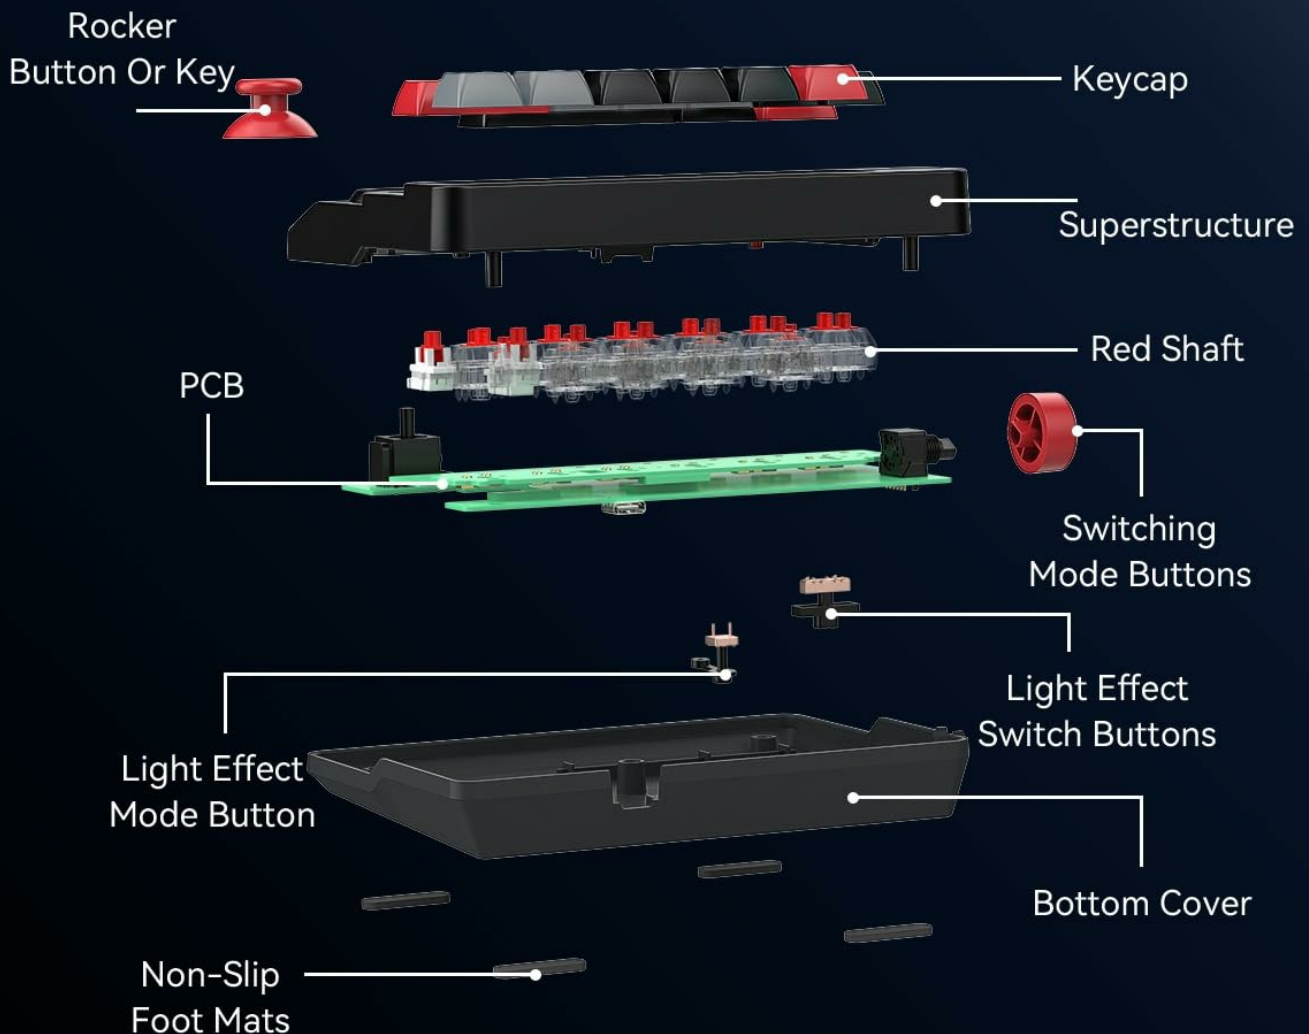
Exploded view illustrating the keypad's internal structure, including the Keycap, Rocker Button/Key, Superstructure, PCB, Red Shaft (switch), Switching Mode Buttons, Light Effect Switch Buttons, Bottom Cover, and Non-Slip Foot Mats.
